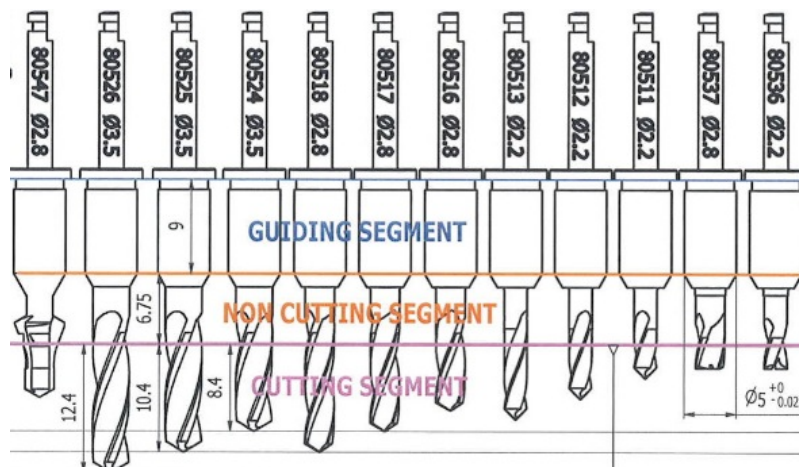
The drilling sequence. Each drill has an identical guiding segment, whereas the cutting segments differ in length and diameter.
